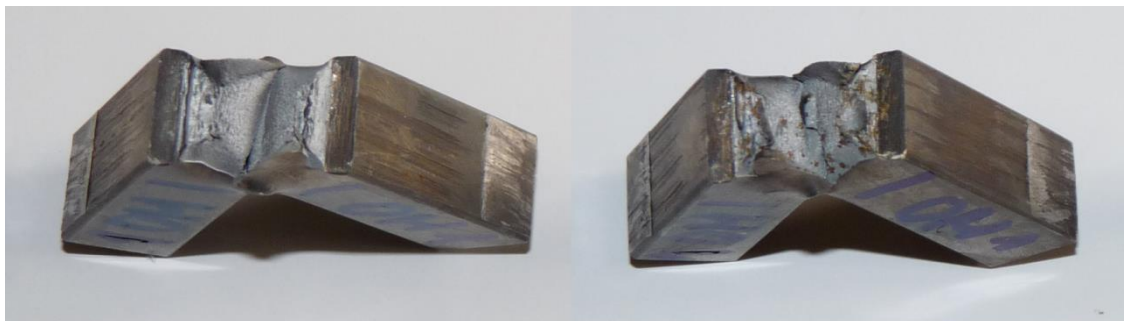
Appearance of the samples' fracture surfaces.
